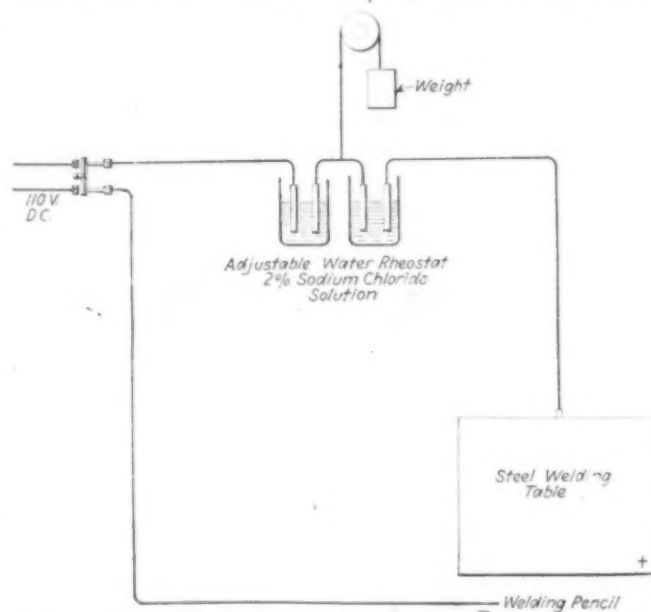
ARRANGEMENT OF APPARATUS FOR WELDING
